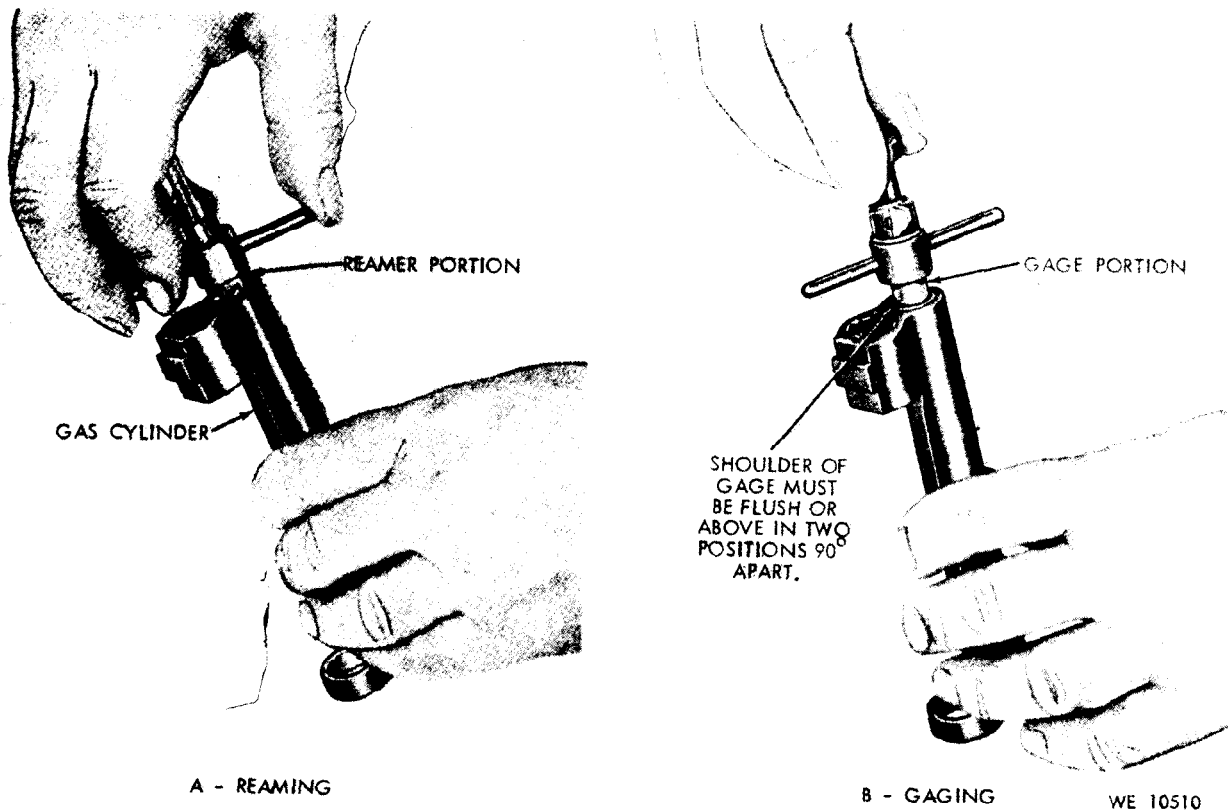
Use of gas cylinder diameter plug gage 7319919.
